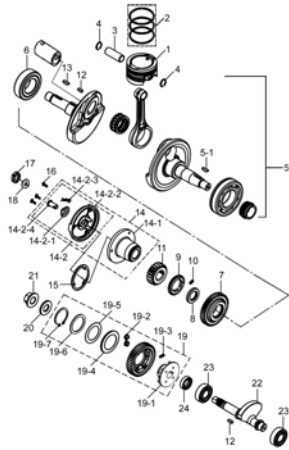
STARTER CLUTCH (P12-S060-0001)
